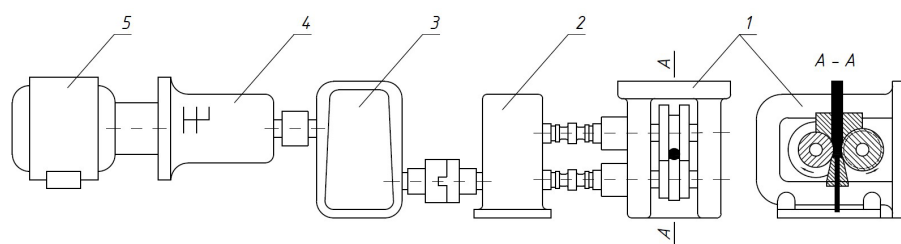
Unit CRE-200 for combined processing of billet after EMM: 1- working mill, 2 - gear stand, 3 - reducer, 4 - gearbox, 5 – engine.
